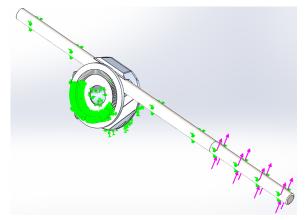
Bottom view of the fixtures and loads applied on the components of the simulated clamp concept during weightbearing.
